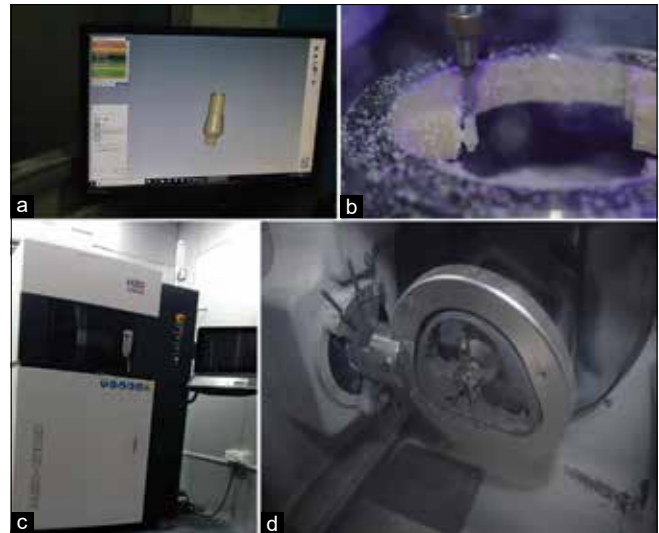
(a) Scanned image of the stock abutment. (b) Milling of polymethyl methacrylate patterns for the fabrication of cast abutments using lost wax casting technique. (c) Fabrication of Sintered abutments with laser sintering machine. (d) Milling of cobalt-chromium alloy for fabrication of milled abutments
